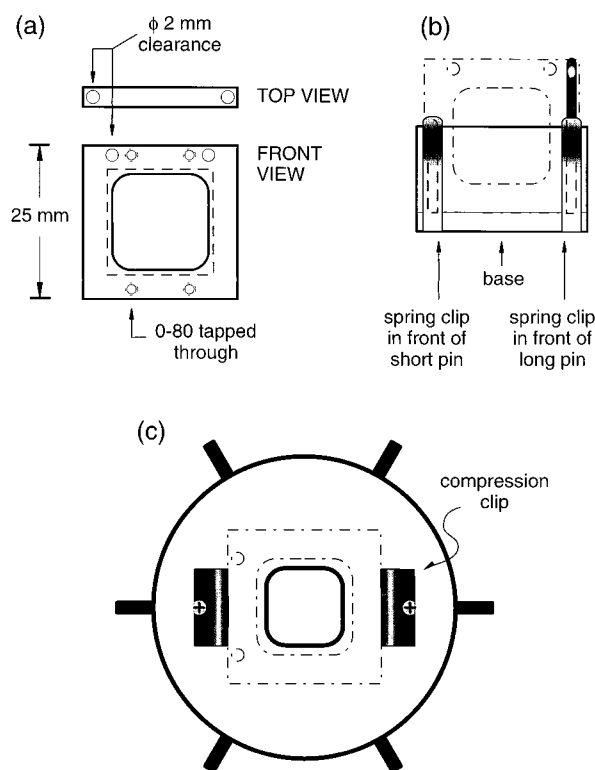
(a) Schematic drawing of a "window frame" design sample holder. Samples up to $17 \text{ mm} \times 17 \text{ mm}$ (dashed square) can be mounted onto the front by four 0–80 screws. (b) Front view of the modified sample stage on the STM. The sample holder mounts onto two pins, one shorter than the other, and is held in place by molybdenum spring clips. The raised area near the top of the long pin is shown as a white spot. Outlines of the sections of the pins hidden behind the clips are shown as dashed lines. The dash-dot-dash lines show the outline of a sample holder when mounted. See Fig. 2(c) for a side view. (c) Moly-block used for MBE. The sample holder is held onto the face by molybdenum compression clips attached to the moly-block by tantalum screws. All components are drawn approximately to scale.
